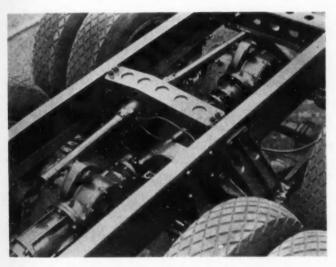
Mack Six-Wheeler with Power Divider on Center Axle
